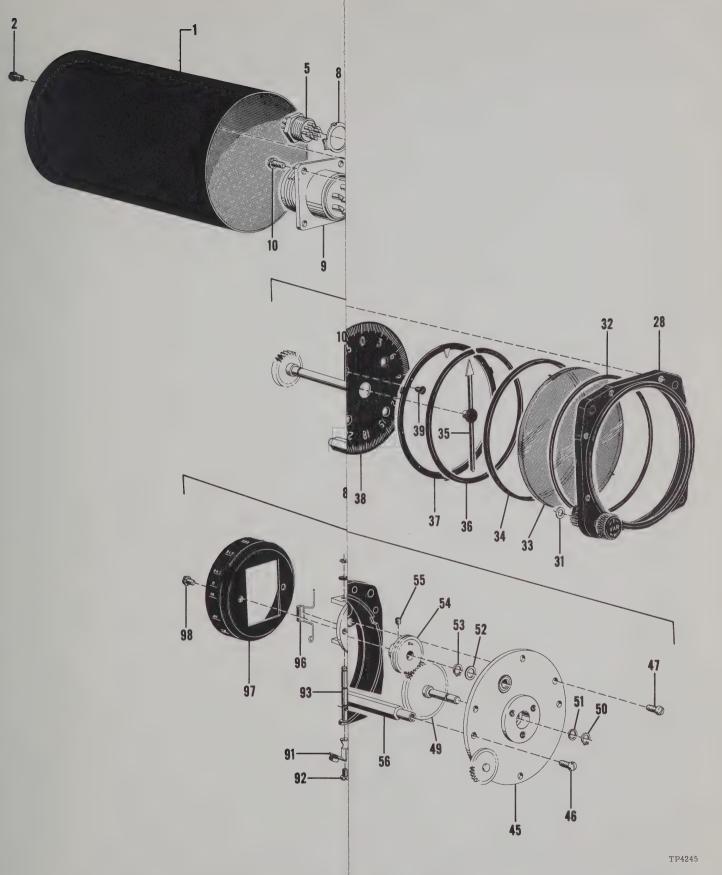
IN-21B or IN-21C Goniometer-Indicator, Exploded View
